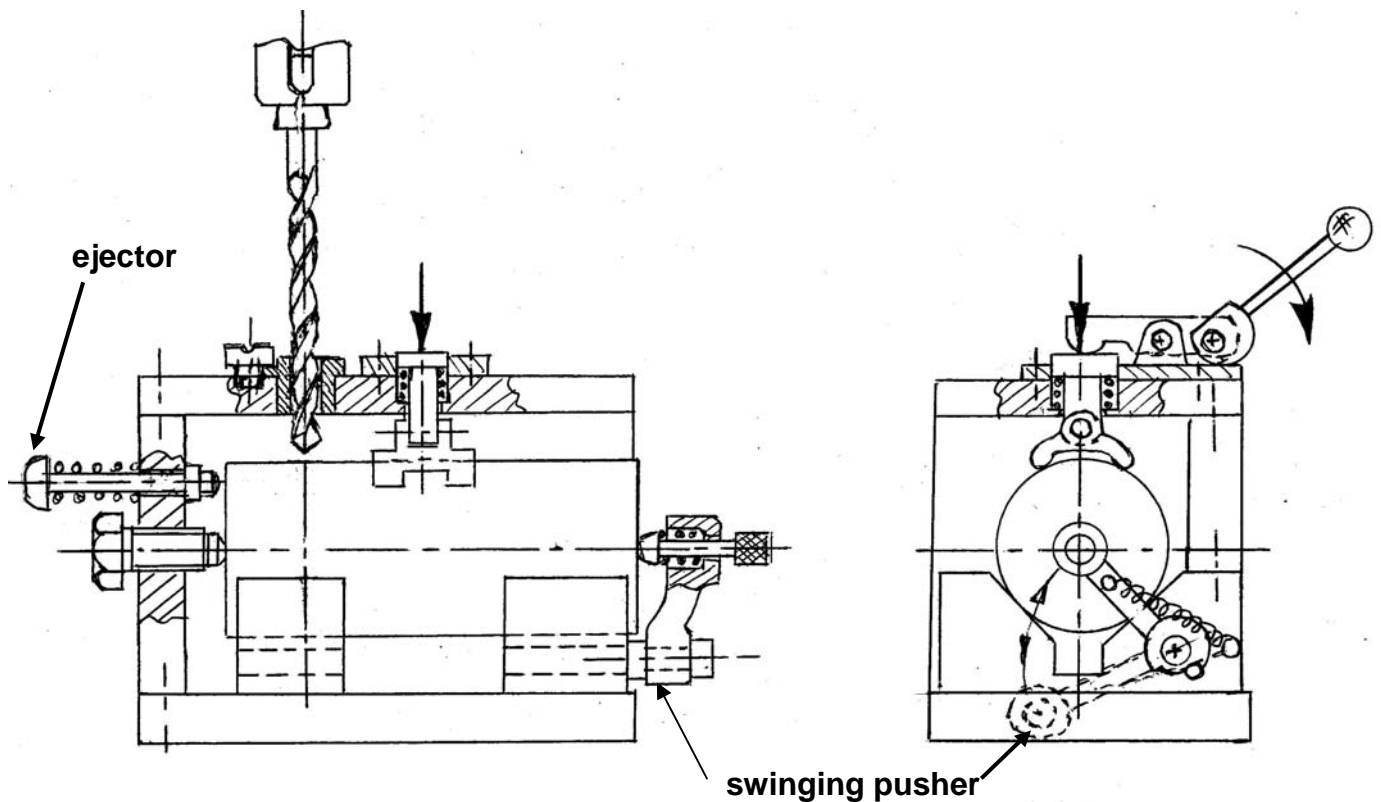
(f) complete jig with assured locating and ejection
